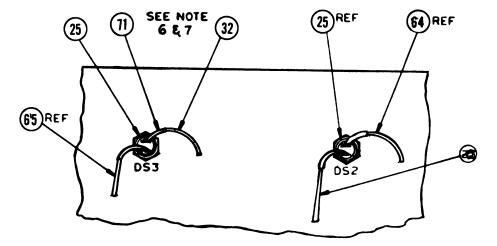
Switchbox Assembly (Sheet 6 of 7)
